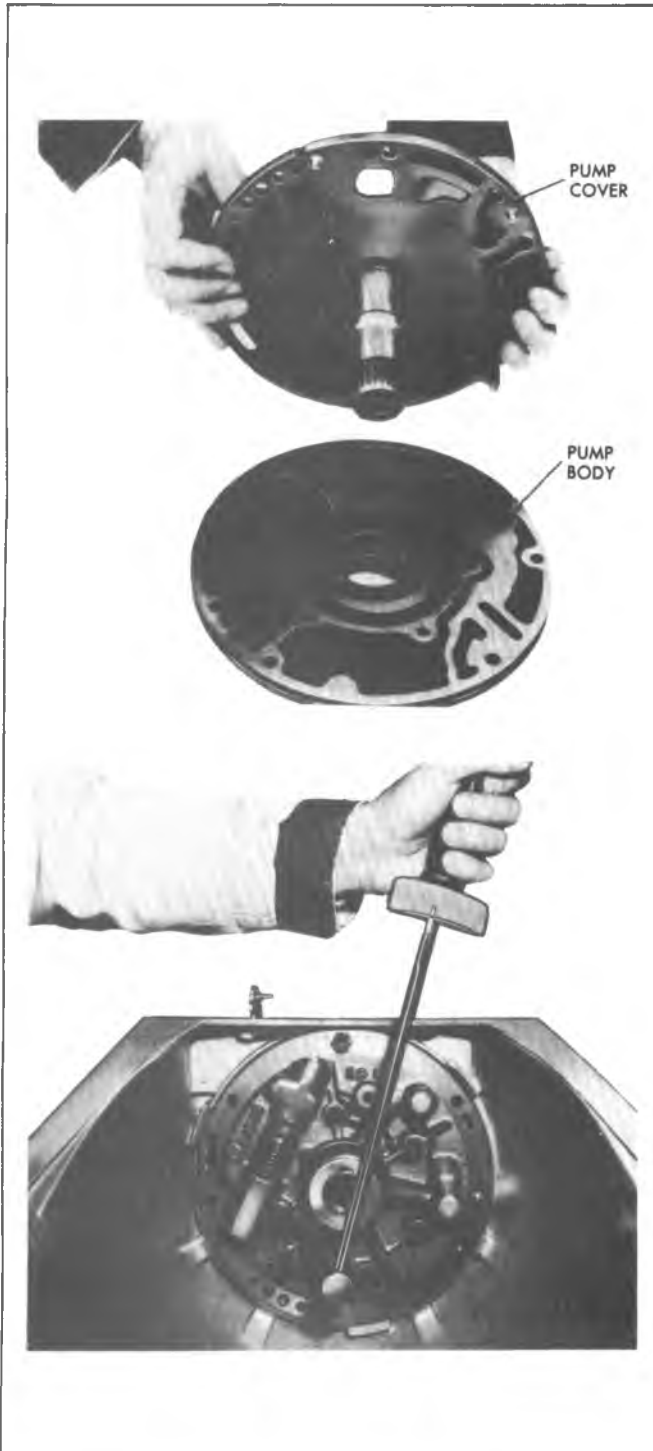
A-78C--Aligning and Installing Pump Cover to Pump Body
